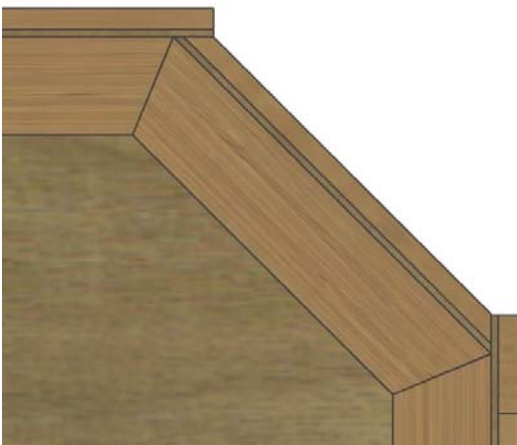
Chamfered crate example (see Appendix B and C for more chamfering examples)
